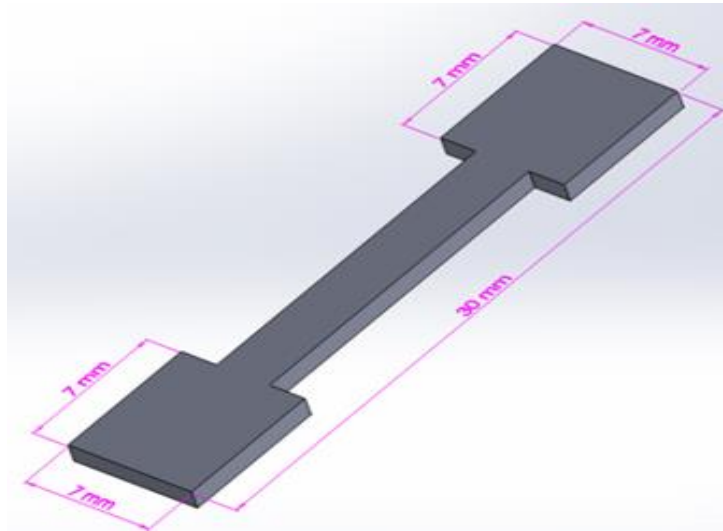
Configurations and Dimensions of the Samples from 304 and 316L Stainless Steels used for Micro Milling.
